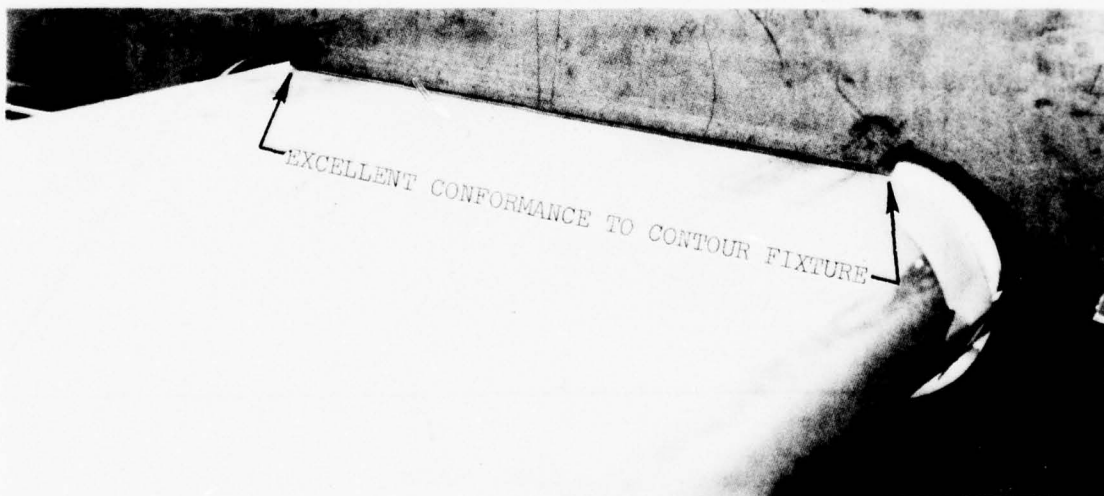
CLOSE-UP VIEW OF CREEP FORMED SPAR ON CONTOUR INSPECTION FIXTURE. NOTE EXCELLENT CONFORMANCE TO CONTOUR FIXTURE.
